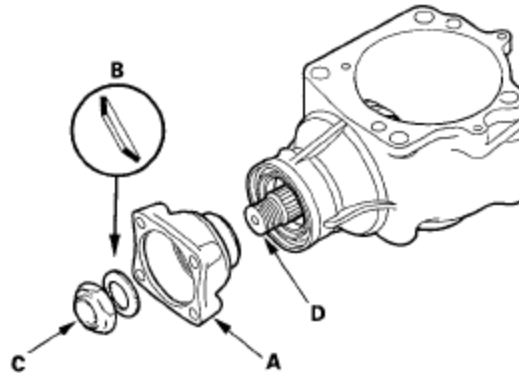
Identifying Companion Flange, Conical Spring Washer And Locknut
